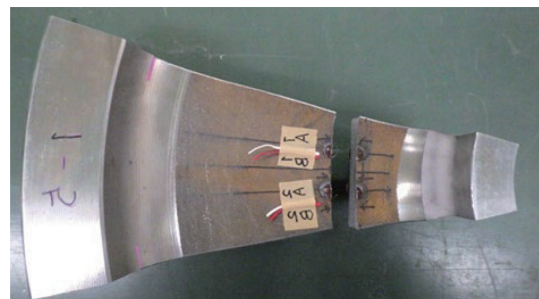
Examples of photos of fractured cut wheel⁶⁾
